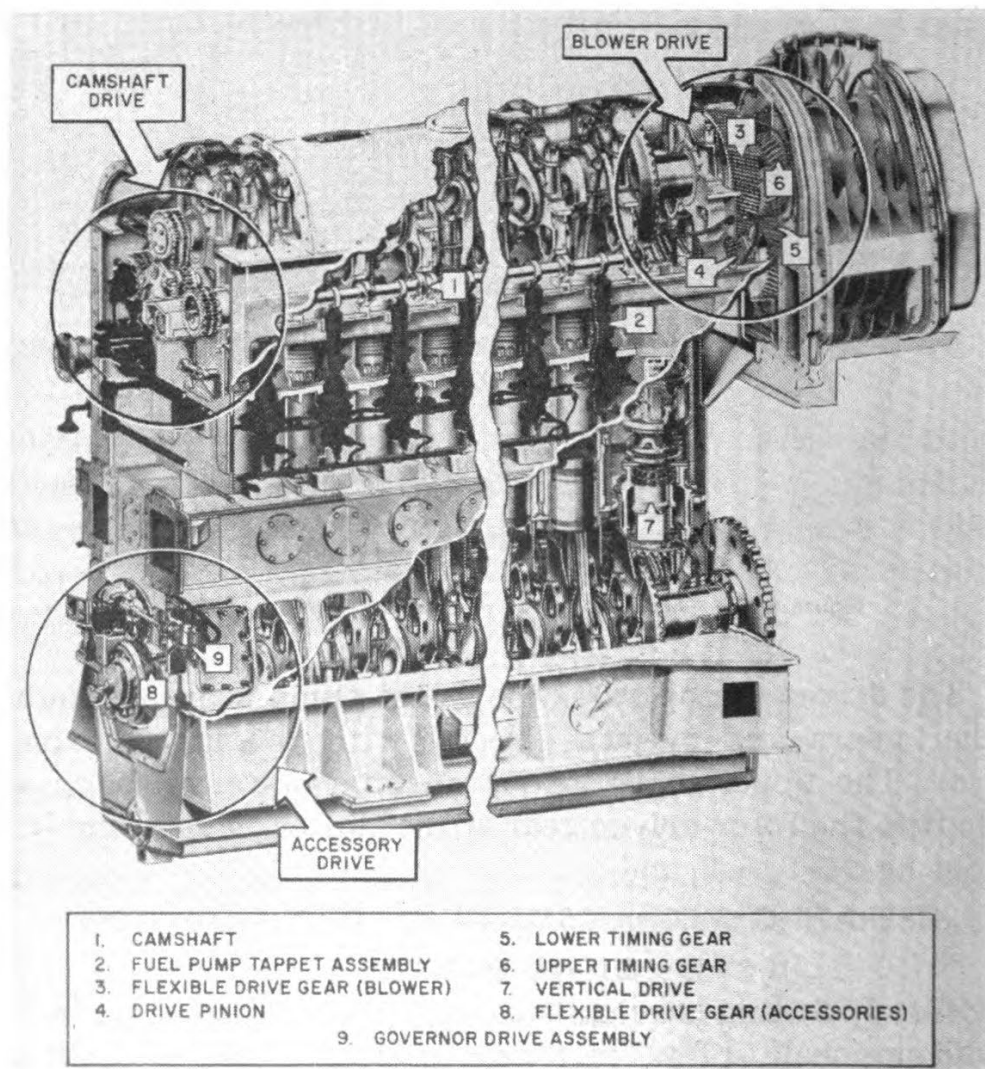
Location of drive mechanisms in an opposed-piston engine (FM 38D8 1/8).
